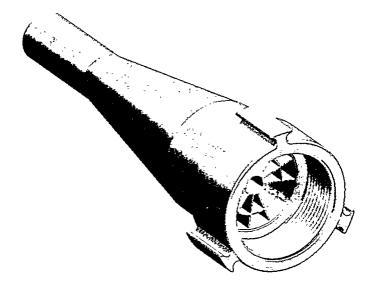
Proposed improved sluicing nozzle with integral removable flow straightener and spanner dogs.
